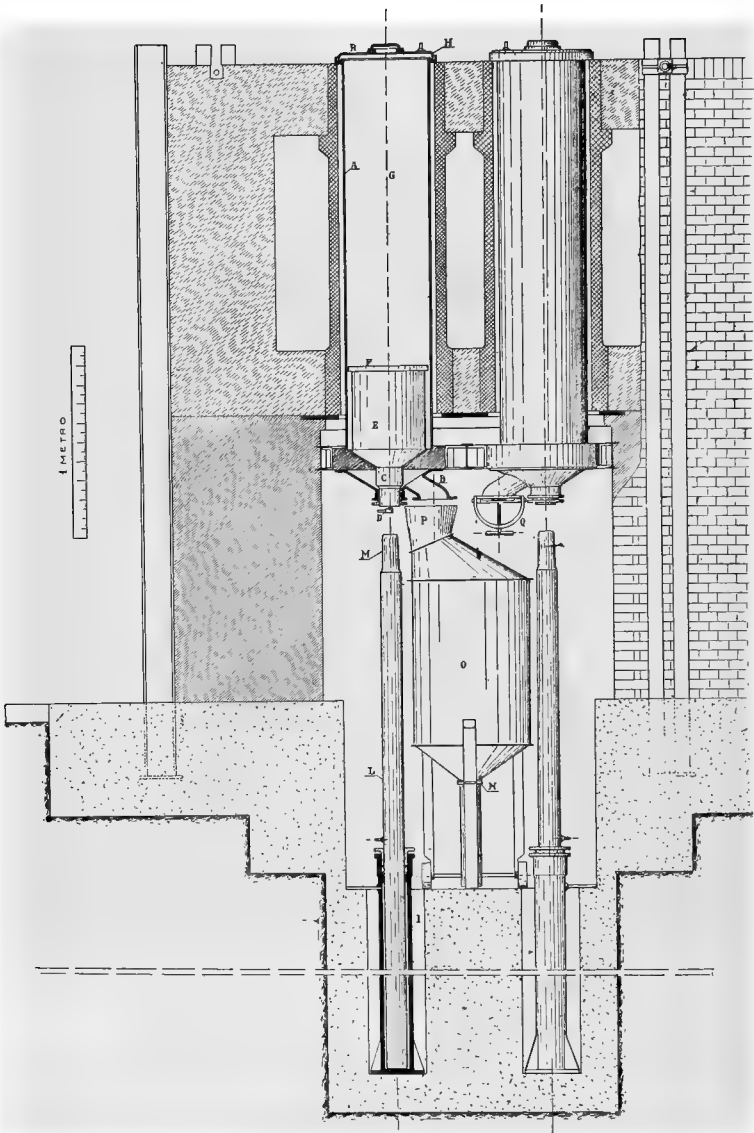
Vertical Muffle Furnace for Case-hardening Mechanical Parts of Small or Medium Dimensions.
